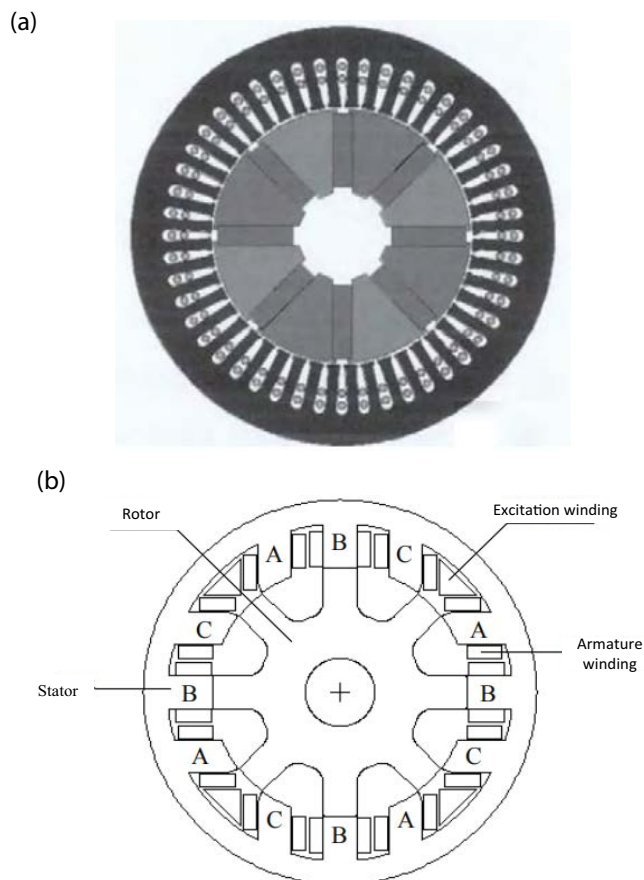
DC brushless generator section: (a) physical sectional drawing and (b) inner structure.
